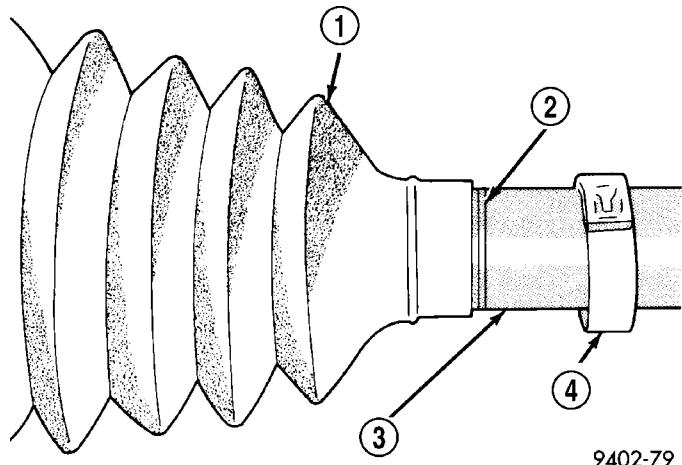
Seal Boot Correctly Positioned On Interconnecting Shaft
